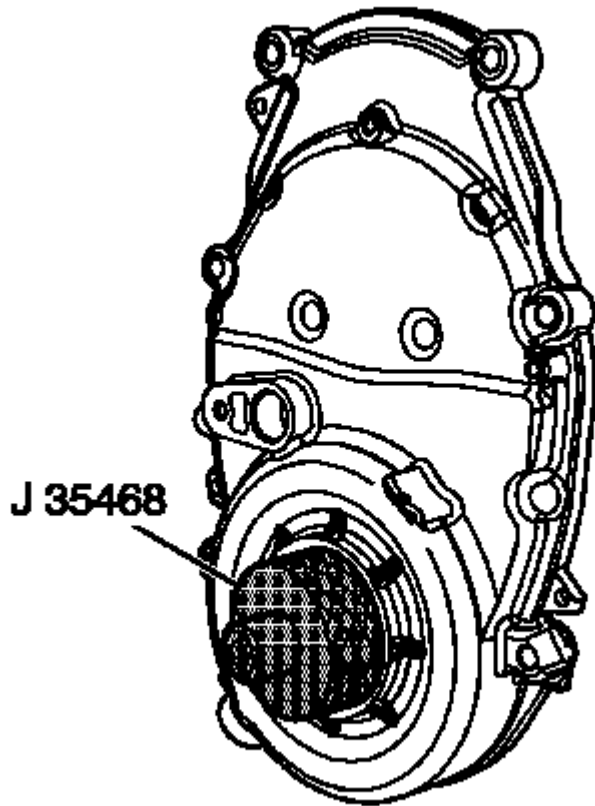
Identifying Front Seal Cover Aligner and Seal Installer
